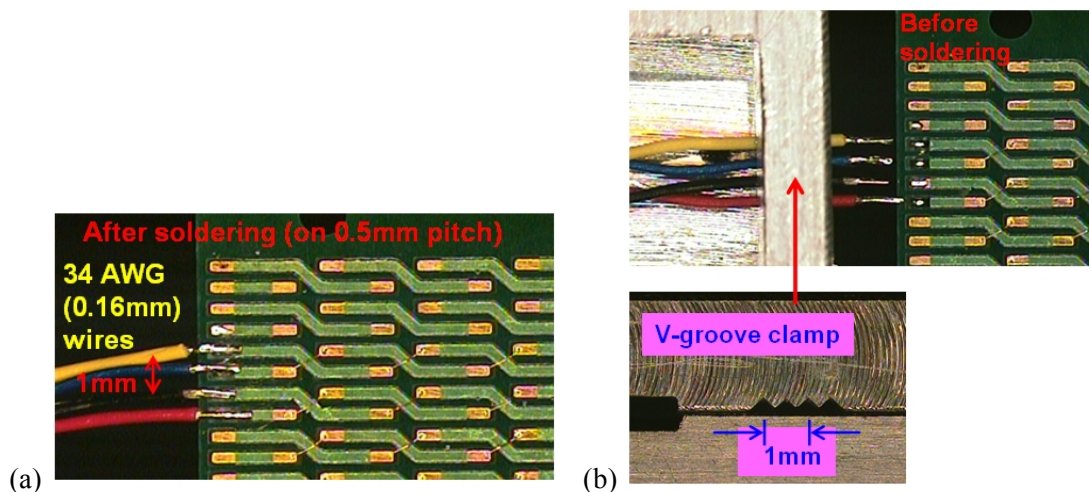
Photographs of twisted pair 34-AWG wires after (a) and before (b) soldering to the VCSEL circuit board. A special V-groove clamp was used to hold the wires on a precise 0.5-mm pitch for soldering
